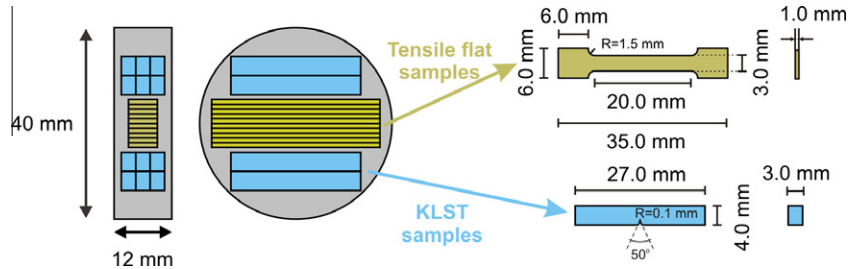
Sketch showing the position, shape and dimensions of the samples cut from the alloy disks for the mechanical tests.
